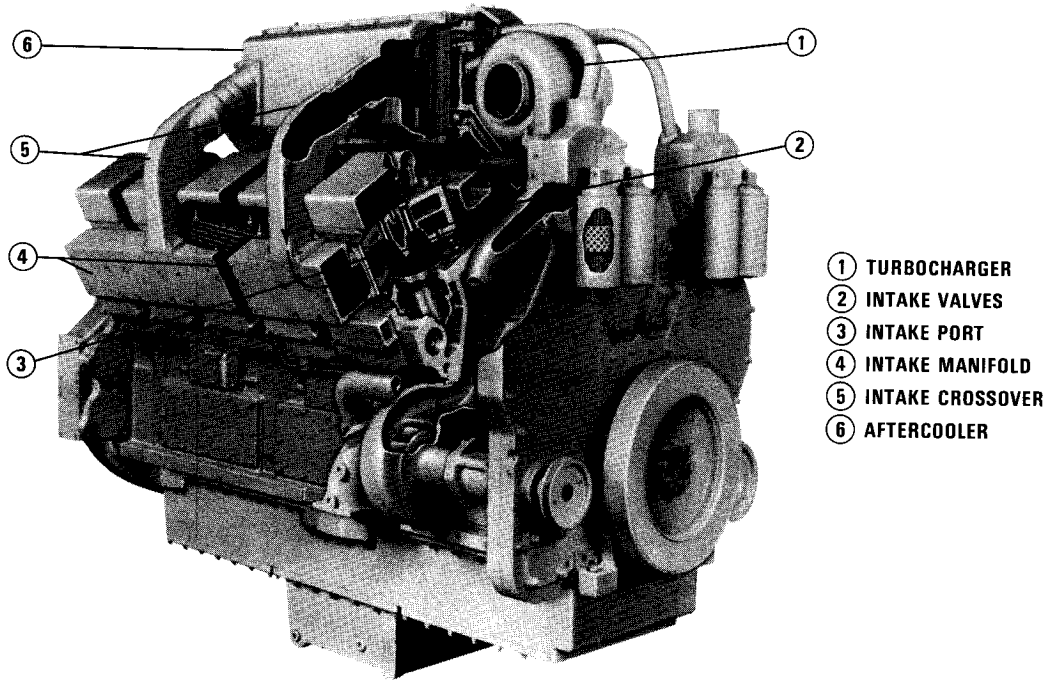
, (AWC-19). Intake air flow — KT(A)-2300 Engine
